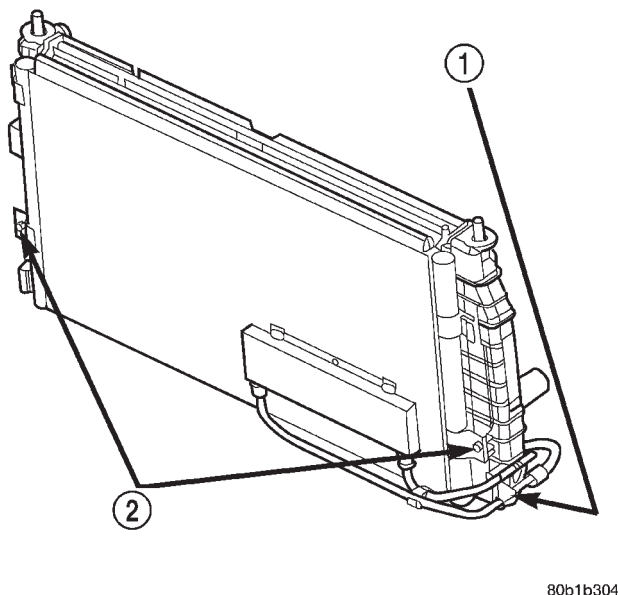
A/C Condenser and Auxiliary Transmission Oil Cooler
